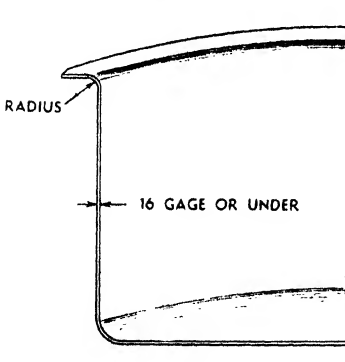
Large parts of 16-gage or thinner metal should have a radius under the flange of $\frac{1}{8}$ to $\frac{5}{16}$ in.
